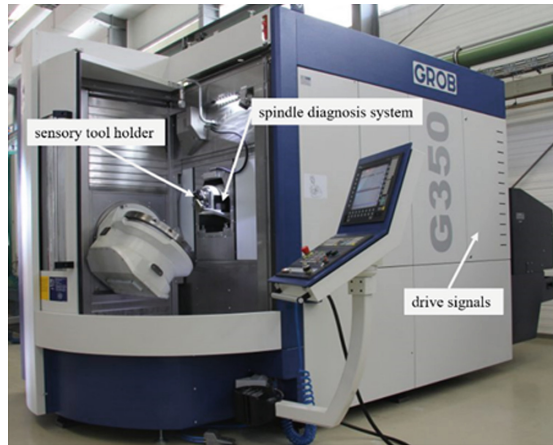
5-Axis machine tool GROB G350 with possible signals used as demonstrator
